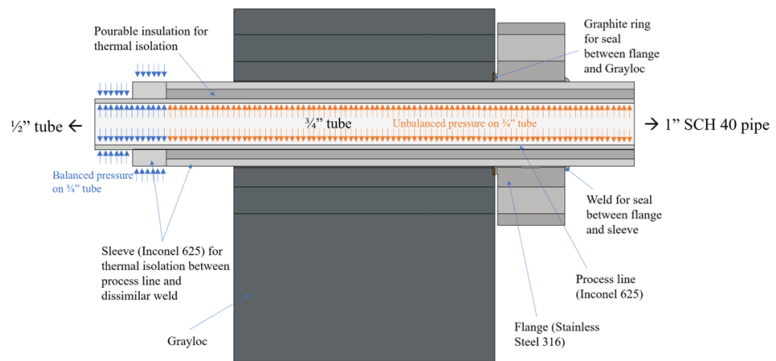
Cold side process line feedthrough assembly with annotated pressure imbalance
